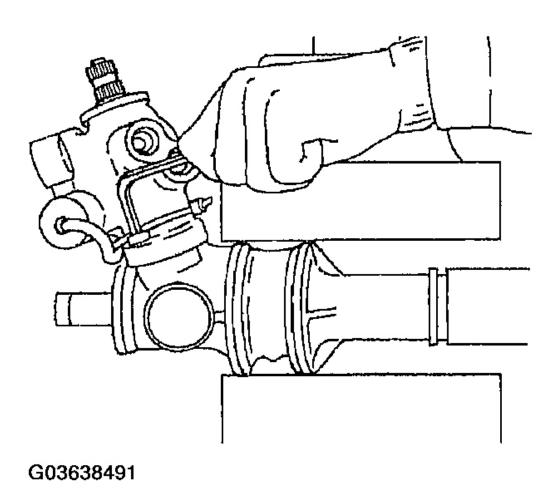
Removing Locknut Courtesy of MAZDA MOTORS CORP.
